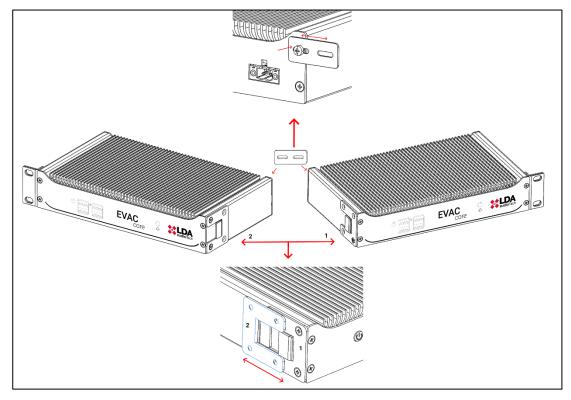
Scheme of joint rack mounting of two EVAC Core devices.
